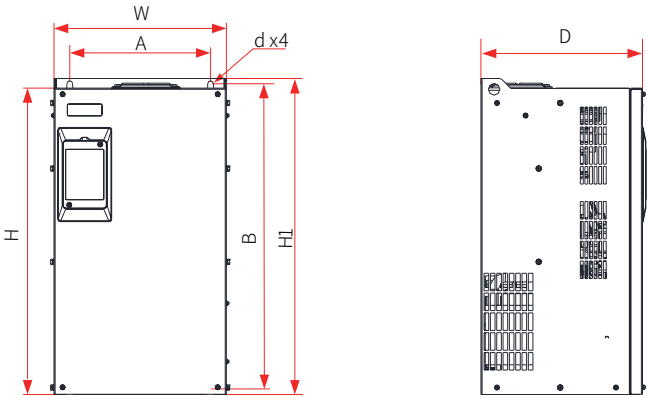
Schematic diagram of outline dimensions and mounting hole dimensions of MD050NT55G to MD050NT160G models
